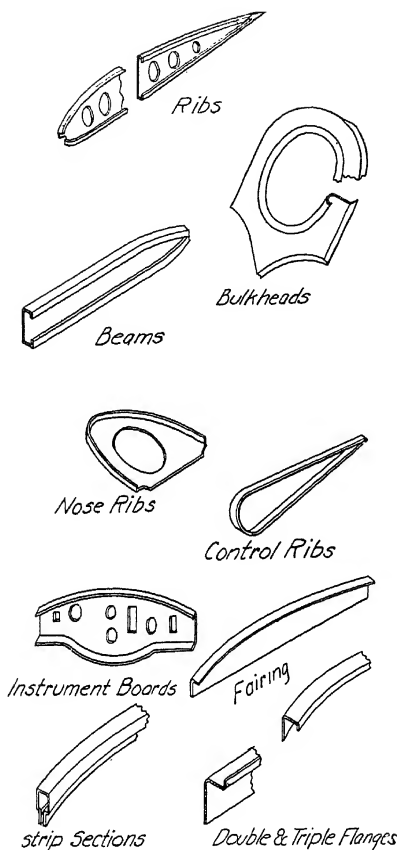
AIRFRAME DETAILS FORMED ON FLANGING MACHINE.
